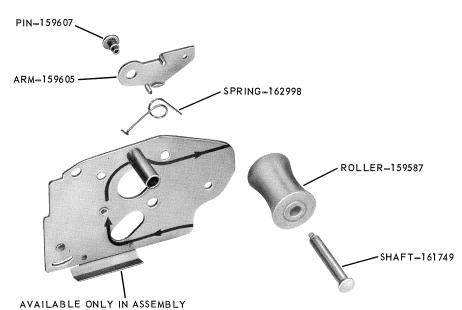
LOWER SPROCKET PLATE ASSEMBLY_181055
